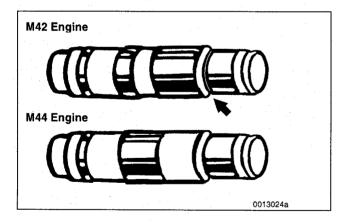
Two versions of hydraulic chain tensioners. Original chain tensioner on M42 engine (top) can be disassembled. Chain tensioner on M44 engine (bottom) cannot be disassembled. Note differences in outer sleeve. Also, the M42 tensioner detent ring groove (arrow) is visible when tensioner is extended.
